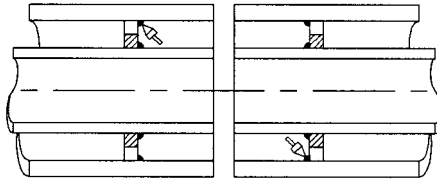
Weld the interstitial supports to the D of the secondary-containment pipe.
